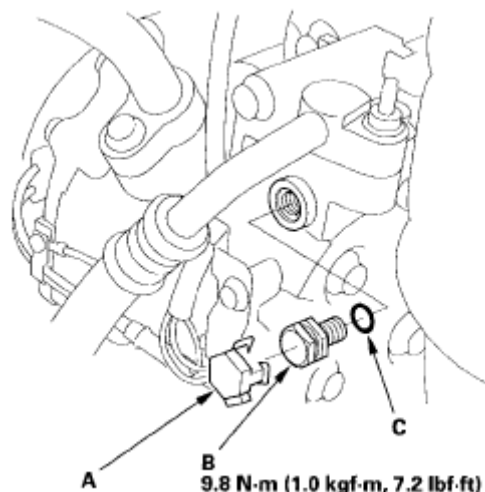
Removing Relief Valve Cover, Relief Valve And O-Ring (With Specifications)
